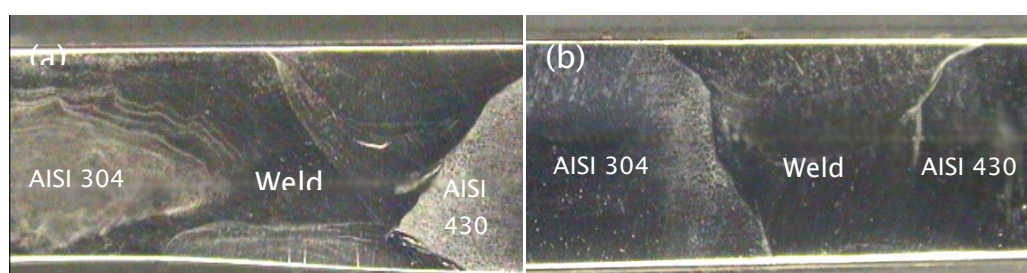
Macro-photographs showing (a)GTA (b) PC-GTA weldments
